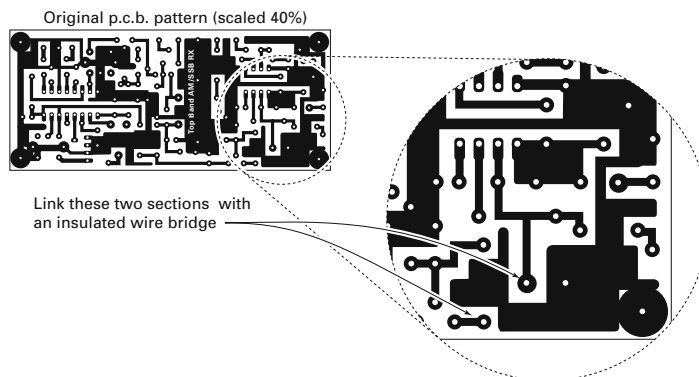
Partial layout of main board showing missing link to make the original p.c.b. work.
